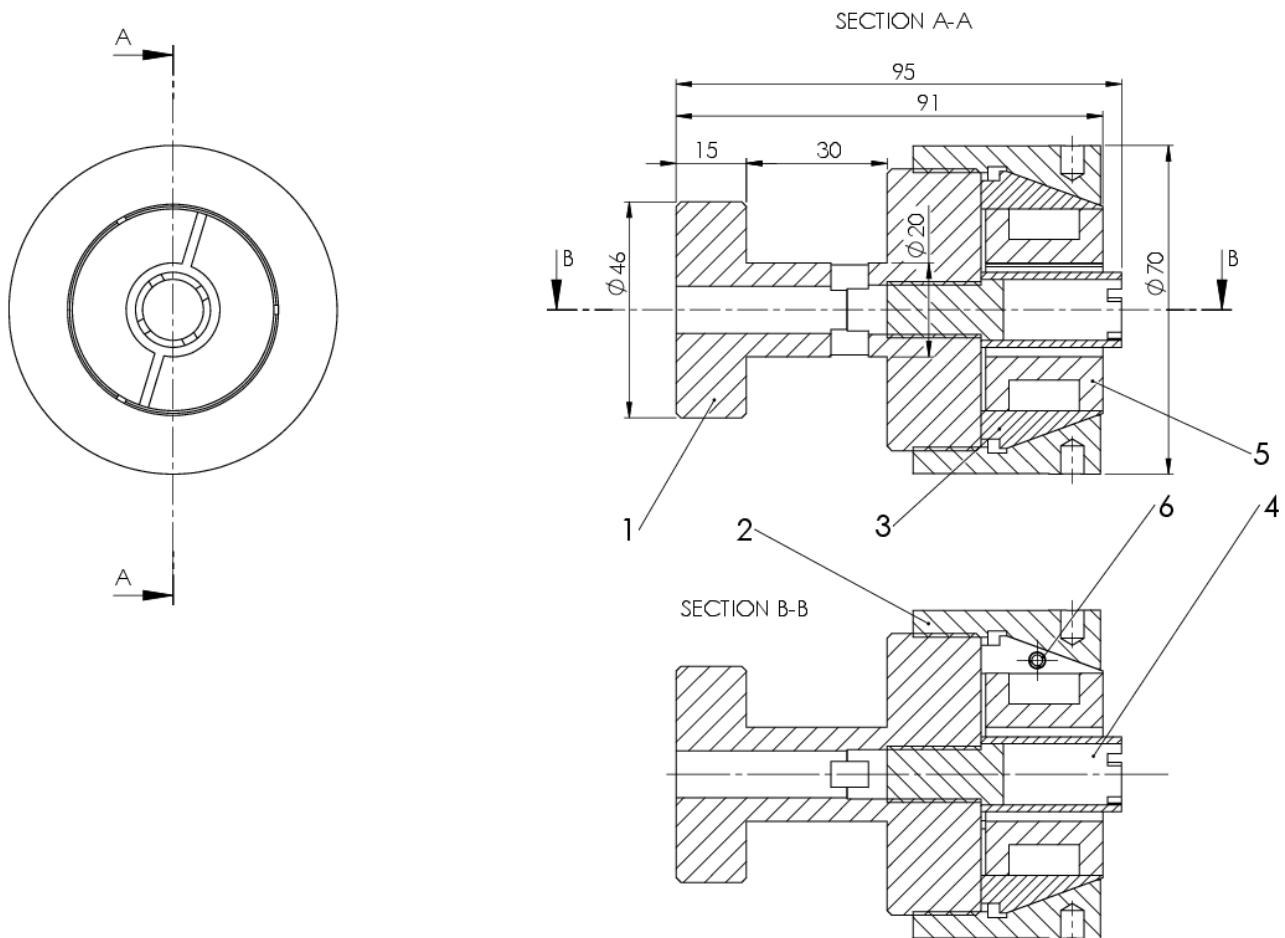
Device for gripping and testing of pipes welded by electro-fusion; 1 – body, 2 – nut, 3 – jaw, 4 – spigot, 5 – gripping element, 6 – spring.
